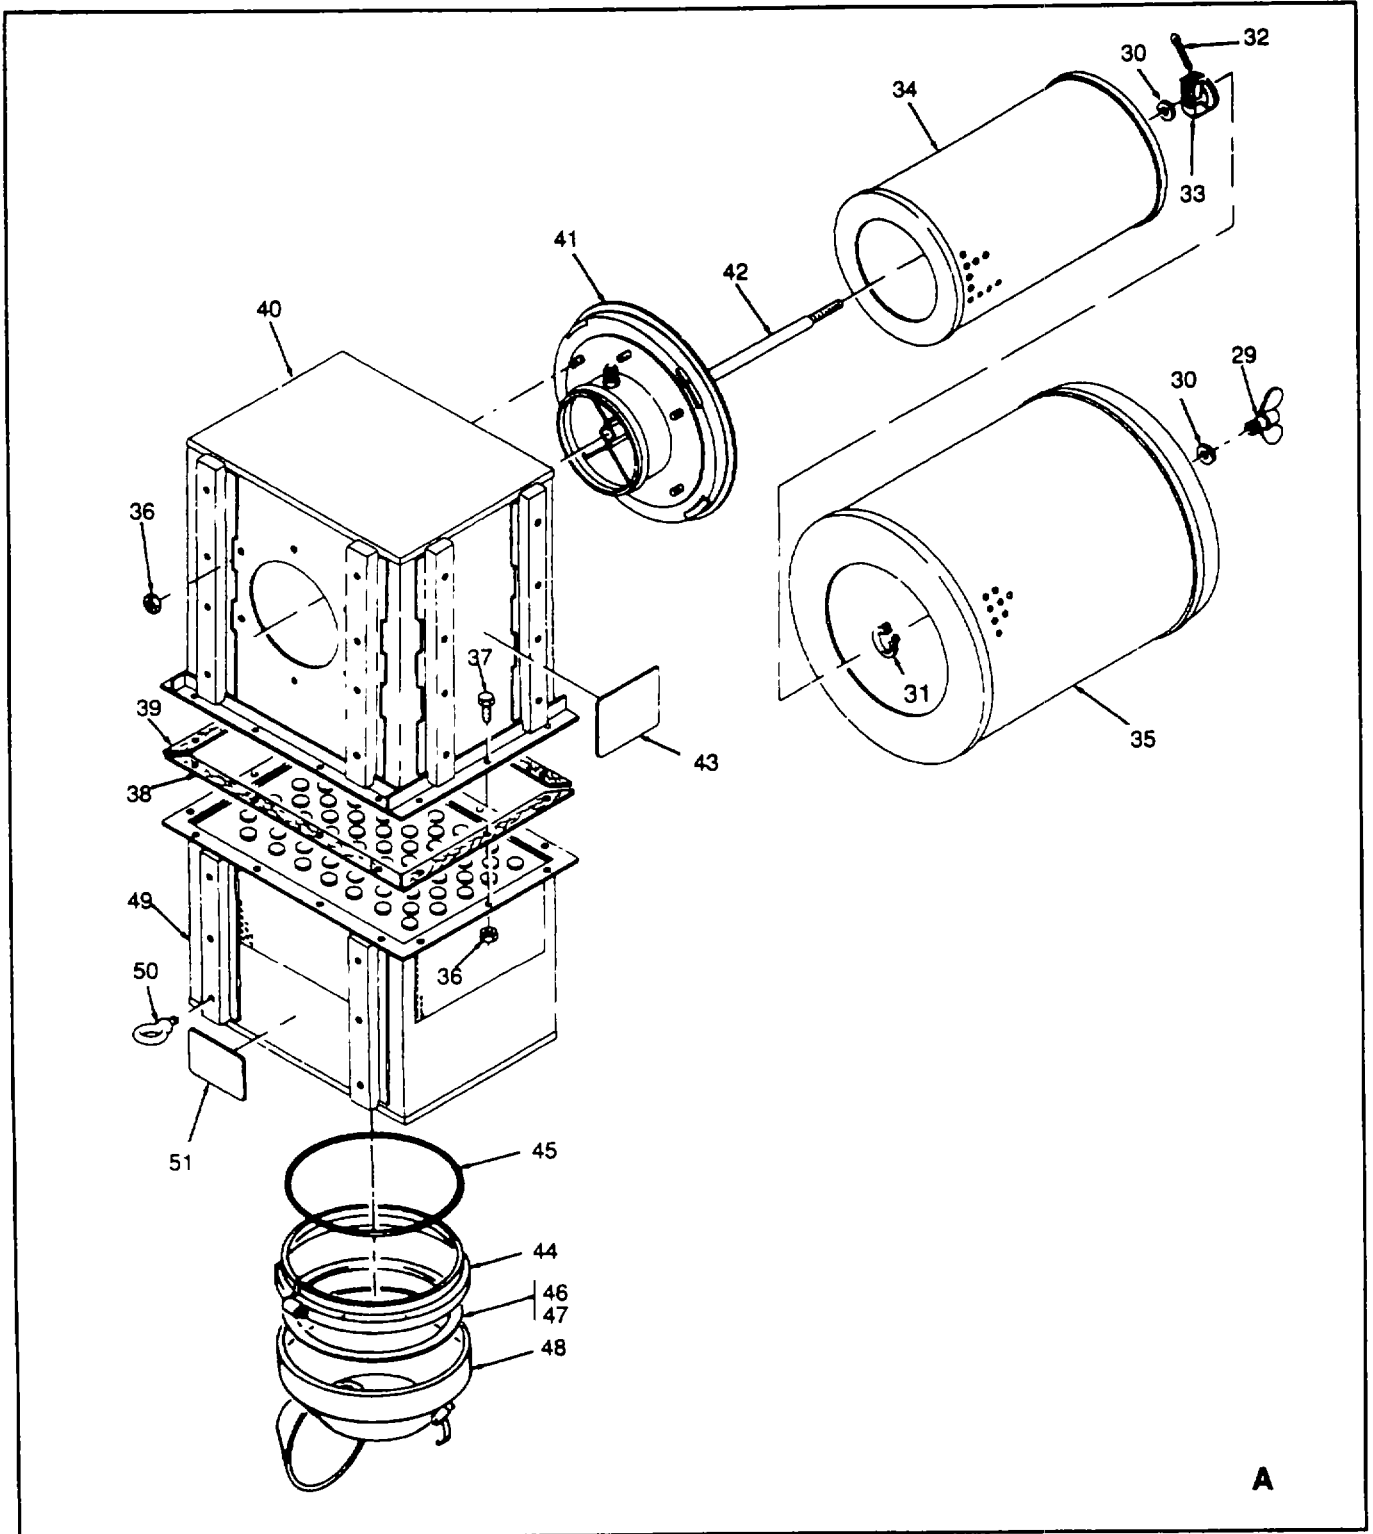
Air Cleaner and Related Parts (Sheet 2 of 3)
